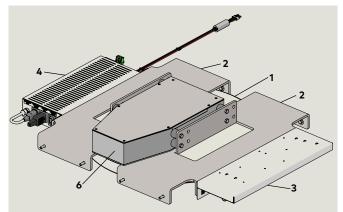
RS6047-002 Motion Assist drive bracket assembly with overhead speed control
